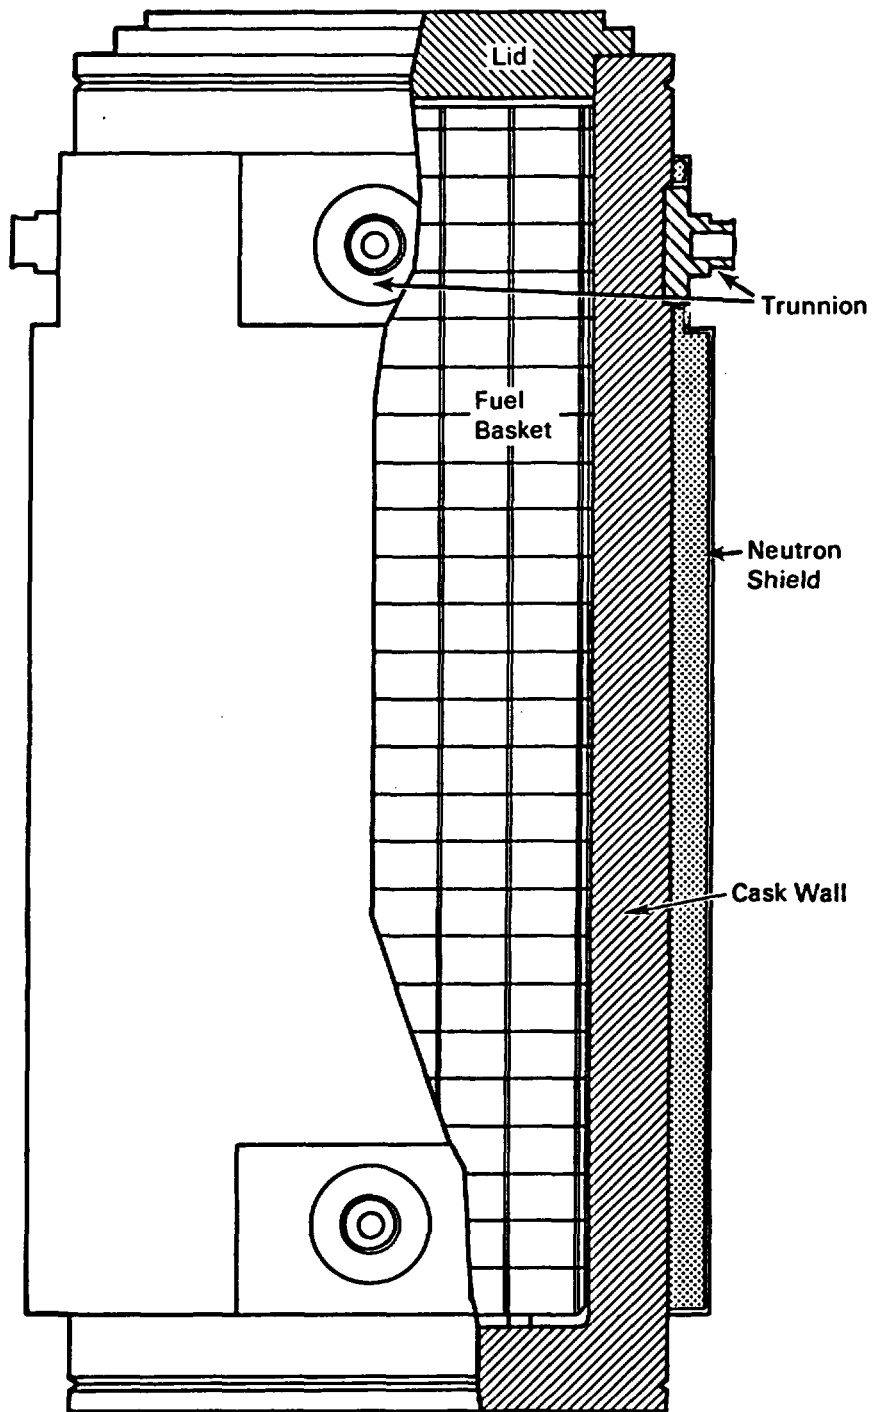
TN-24P PWR Spent Fuel Storage Cask
